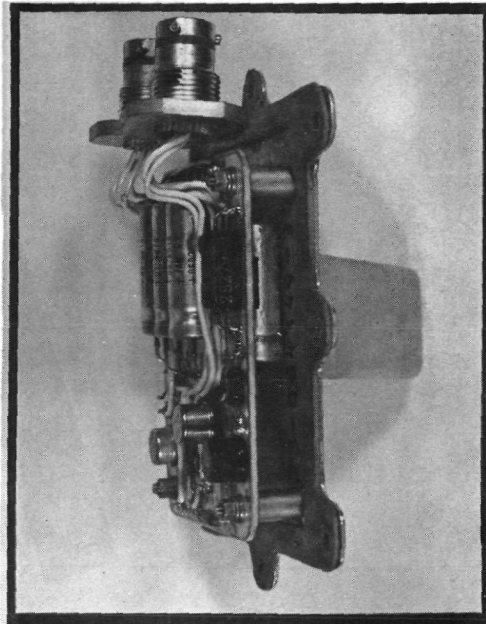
Oblique view of circuit board mounted to bottom cover plate.
